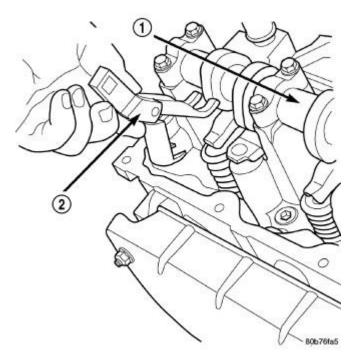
Rocker Arm - Removal/Installation Courtesy of CHRYSLER LLC
